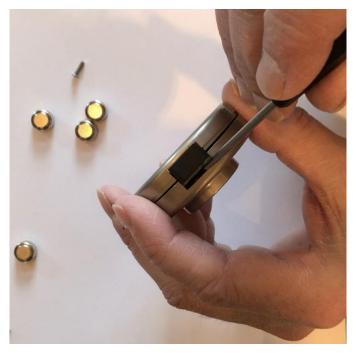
Separating the front and back of the Photo-Bluminator II aluminium case with a small straight tip screwdriver.
